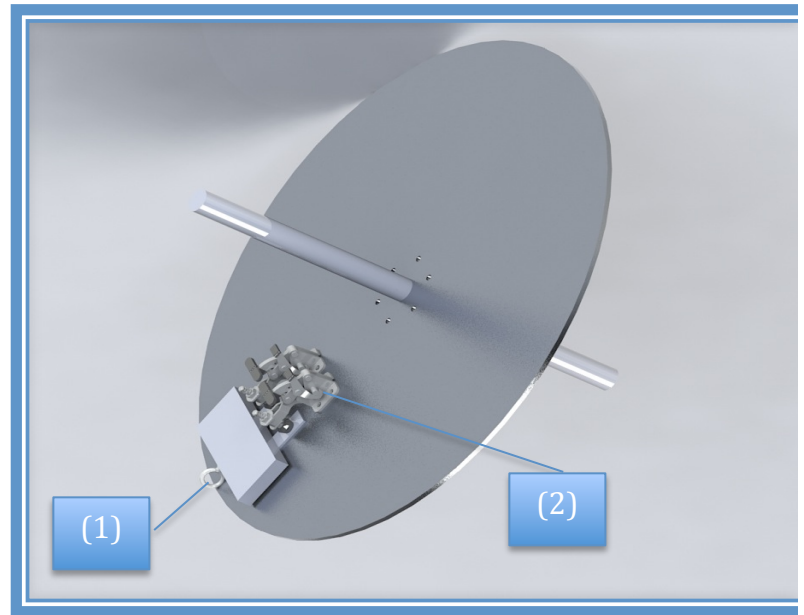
Clamp Test Assembly with Eyebolt (1) and Toggle Clamps (2)
